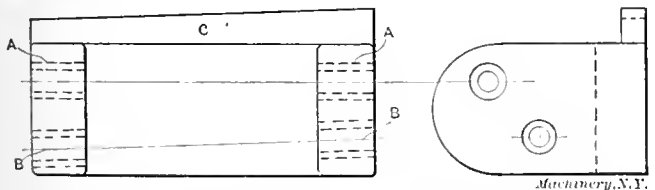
Boring Jig for Boring Holes placed at an Angle to each other.
